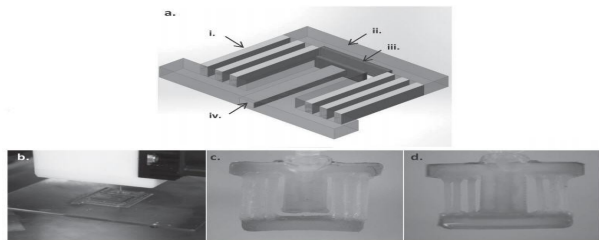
a) Design model of the smart valve, b) Printing of the CAD model of the valve, c) The 4D printed valve in cold water, and d) The 4D-printed valve in hot water [62]
